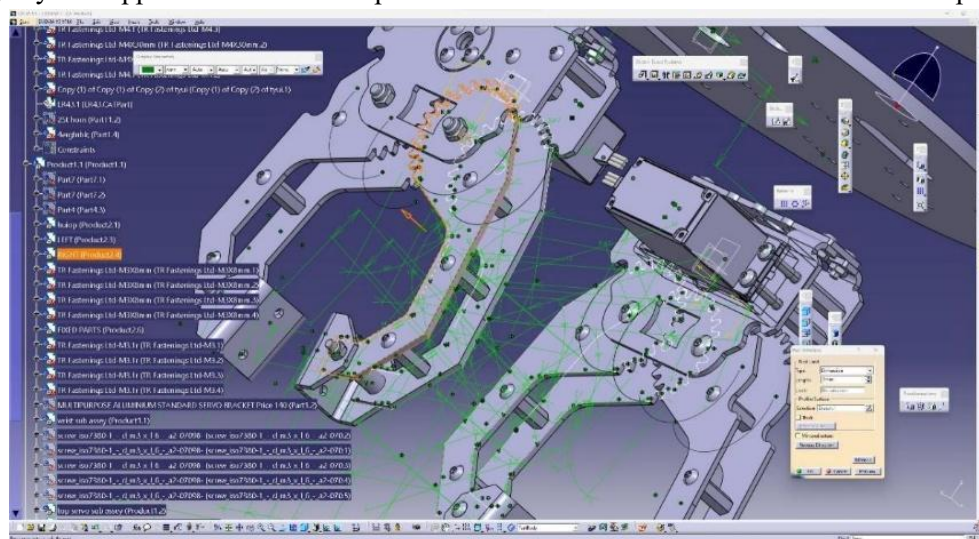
CAD-Based Robotic Assembly and Kinematic Design
